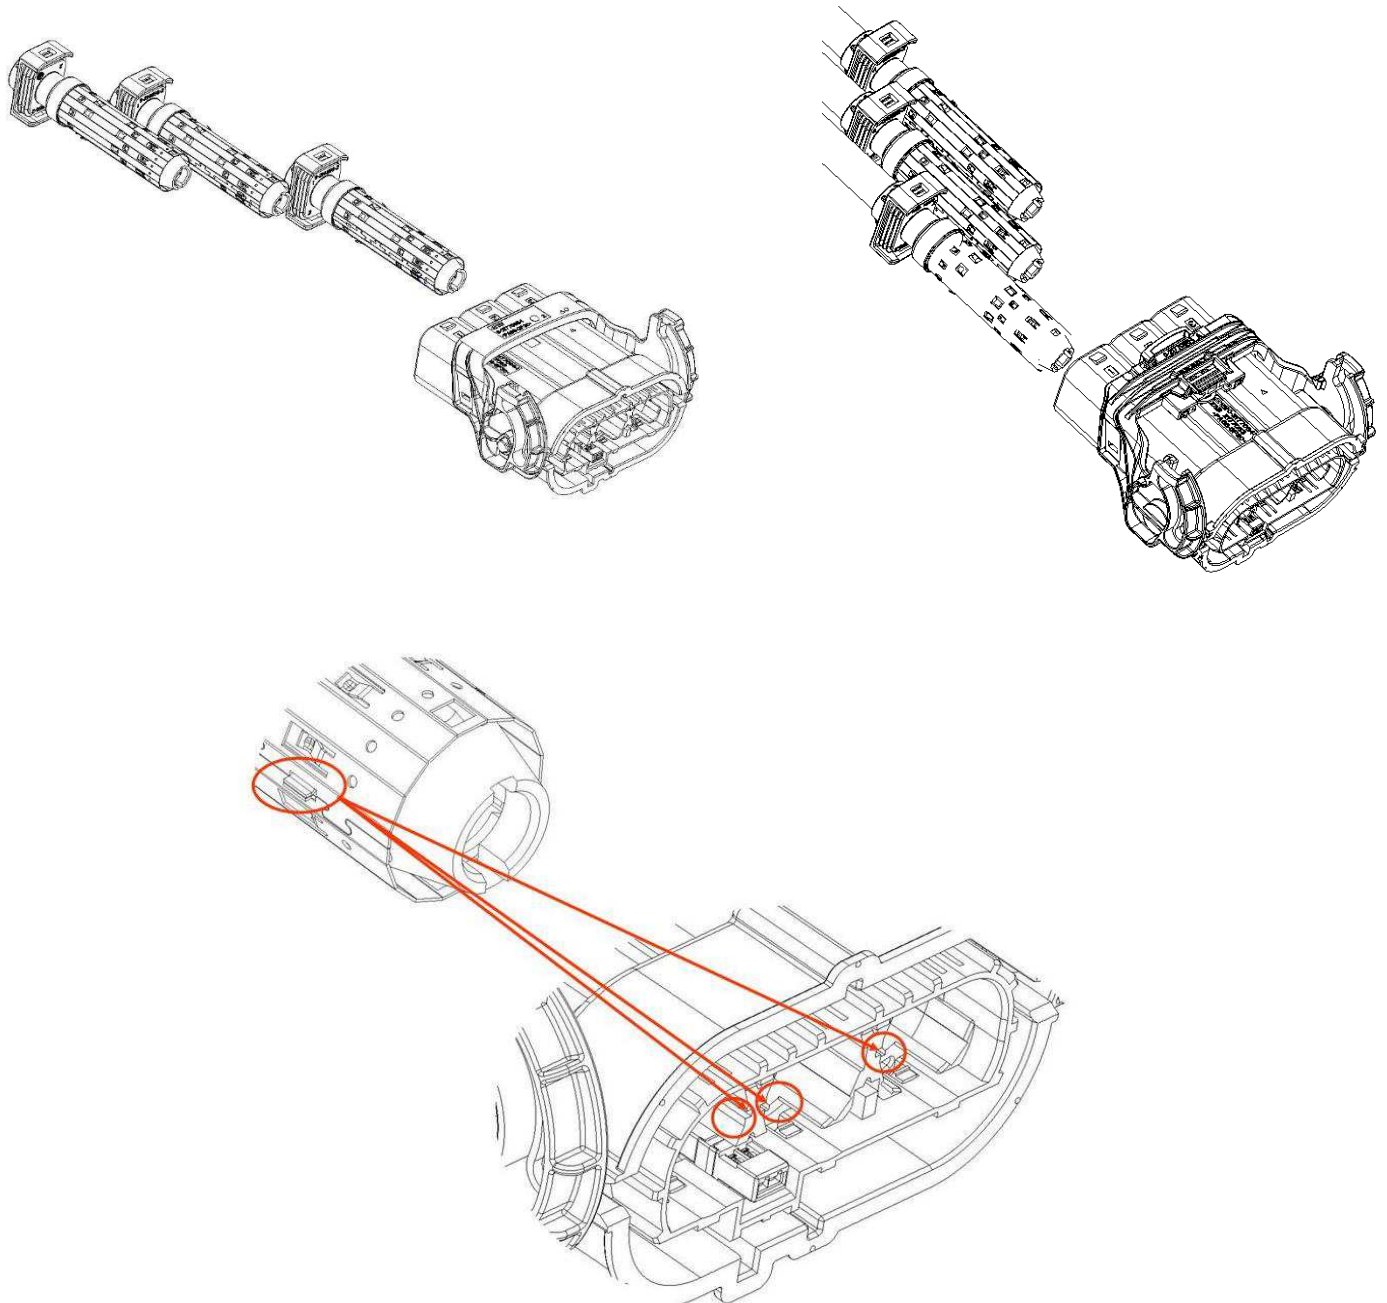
Assembly 3 pos. connector/Montage 3-pol. Stecker
